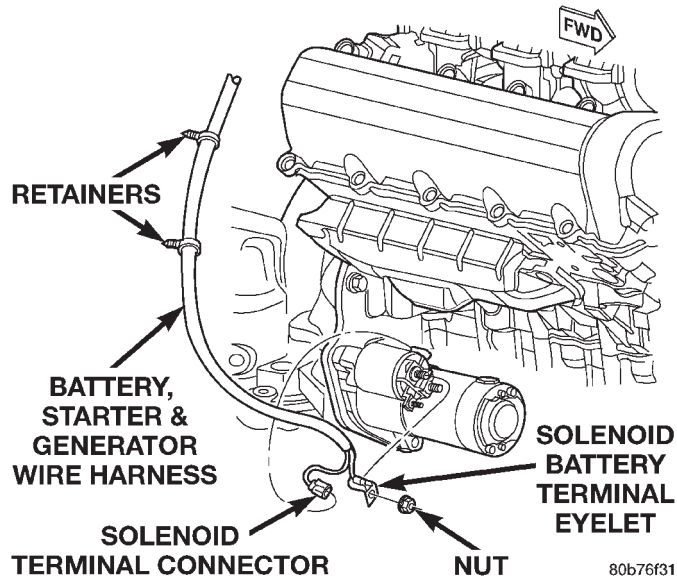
Starter Wire Harness Remove/Install - 4.7L Engine
